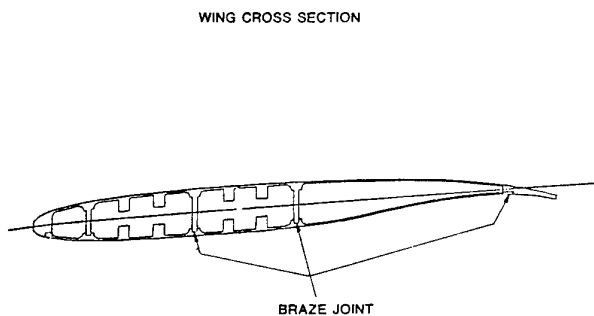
F-111 Wing Cross Section Illustrating Braze Joints.
